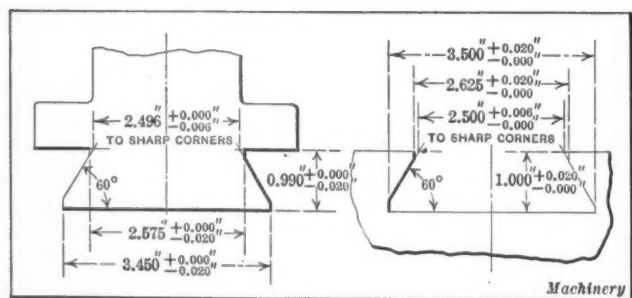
Correct Dimensioning of Dovetail Slide shown in Fig. 13
